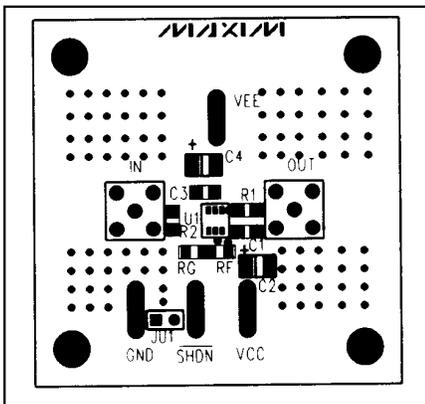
SOT23 High-Speed EV Board Component Placement Guide—Component Side
